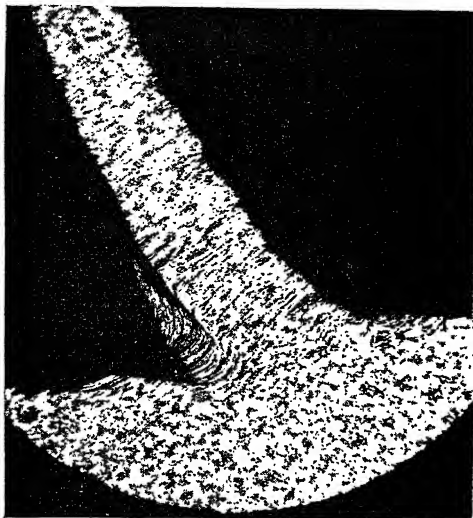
Deformation of a metal "shaving" produced by a lathe tool. (*Courtesy of Hans Ernst and The Cincinnati Milling Machine Company.*)
